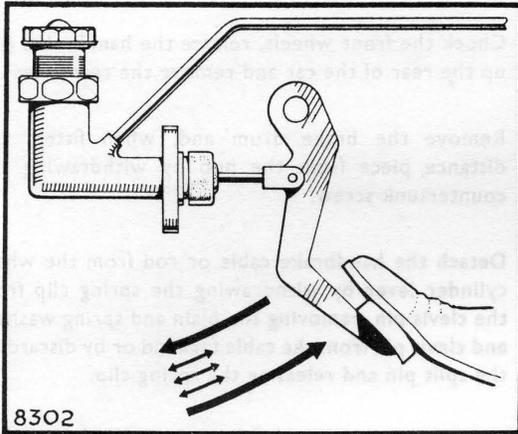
Indicating the long and short pedal strokes necessary to bleed the hydraulic system of air
